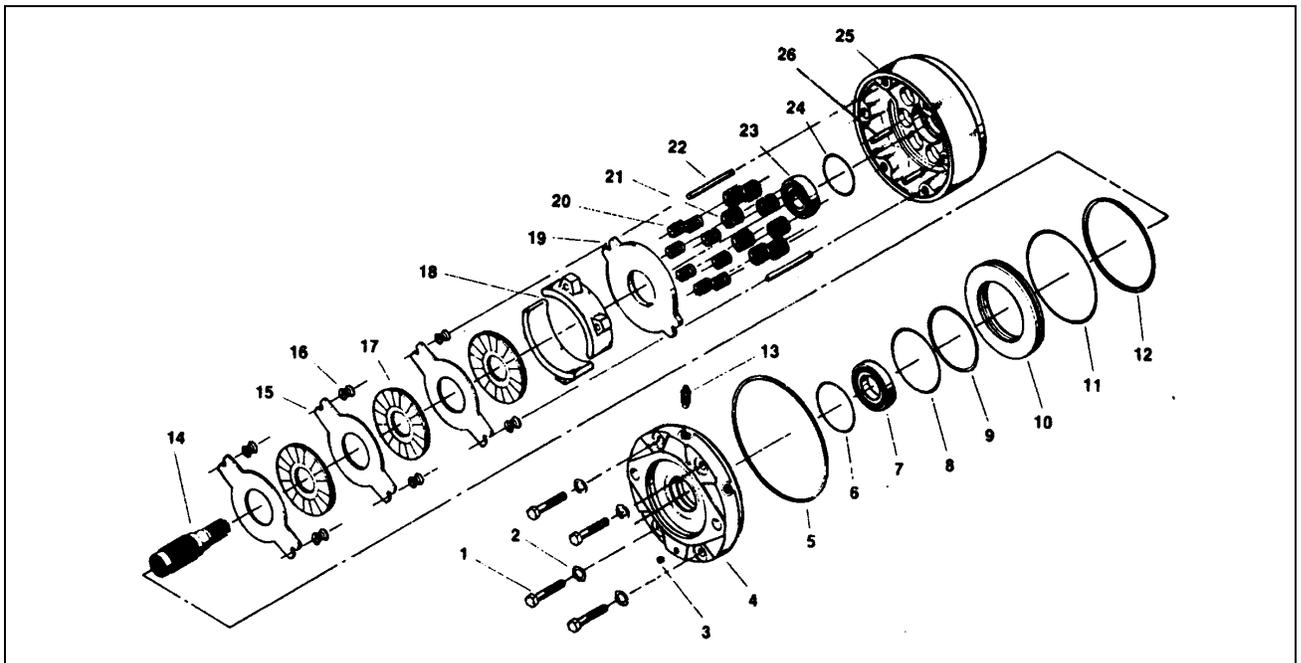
Drive Brake Assembly - Mico (Machines Built Prior To May 1992).
